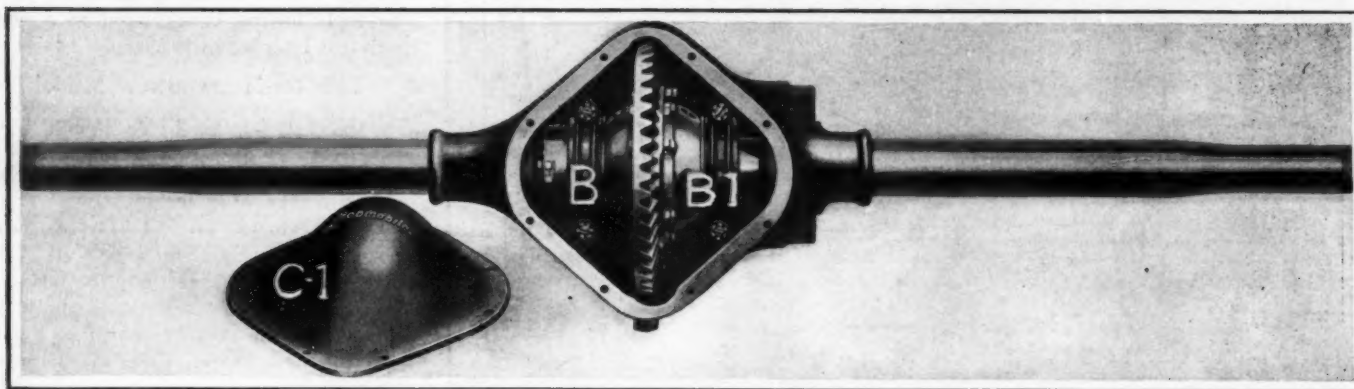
View of the new live rear axle fitted to the Locomobile six with cover removed
